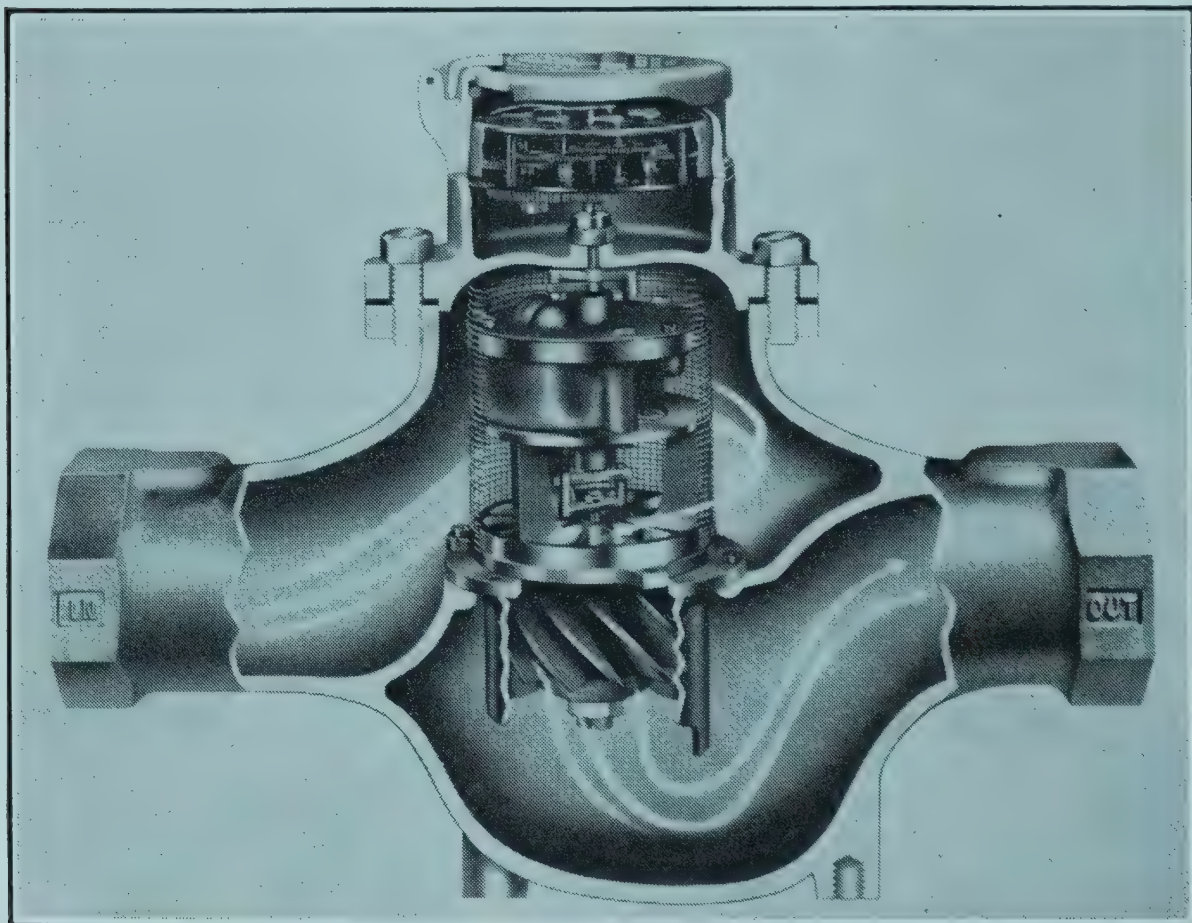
A propeller meter. (*Courtesy Pittsburgh Equitable Meter Division, Rockwell Manufacturing Co.*)
